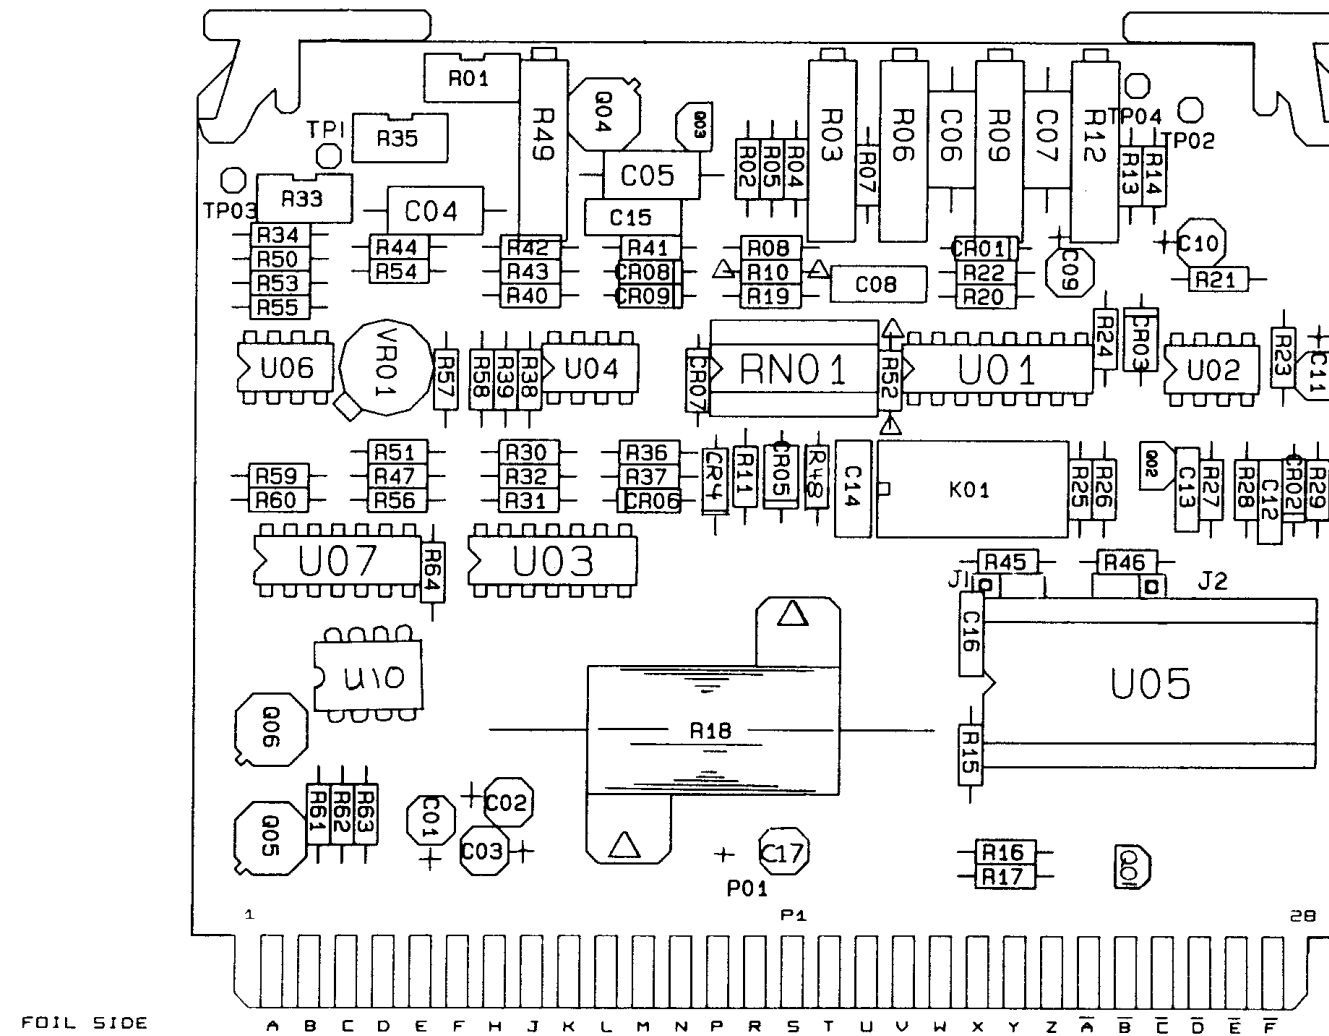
A1A7-A1A9 YIG Driver PCB Parts Locator, Assy D32107-4, -5, -8
